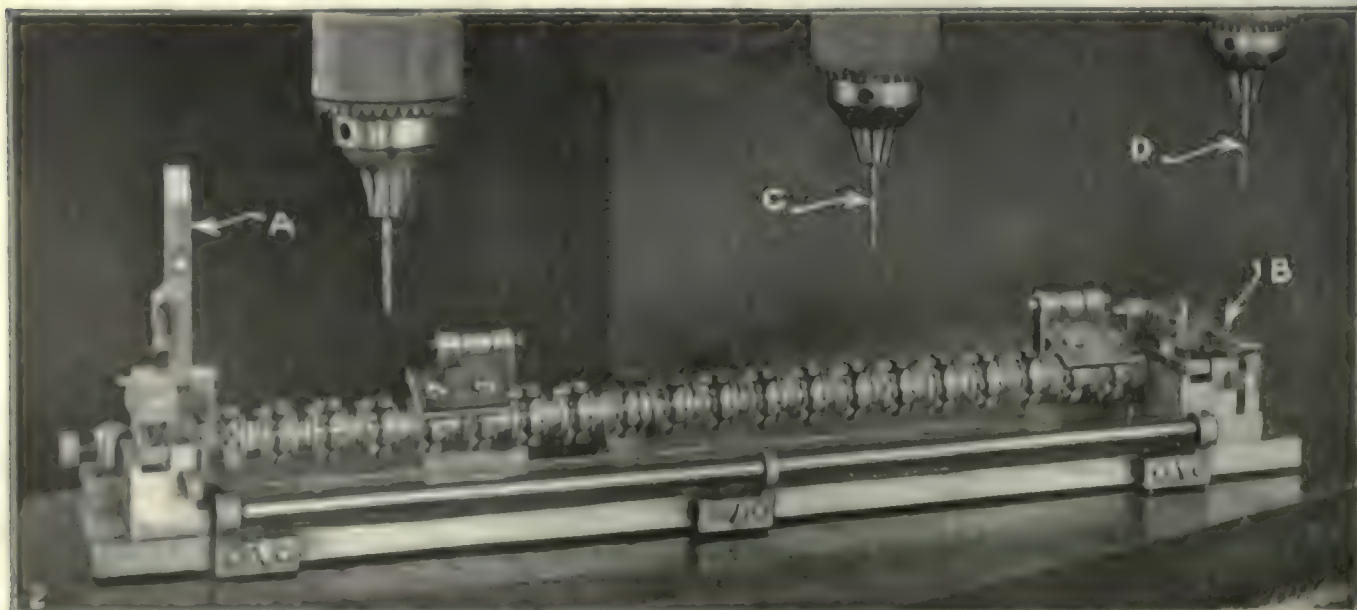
TESTING LOCATION OF PIN. FIG. 2—DRILLING AND REAMING PIN HOLES
